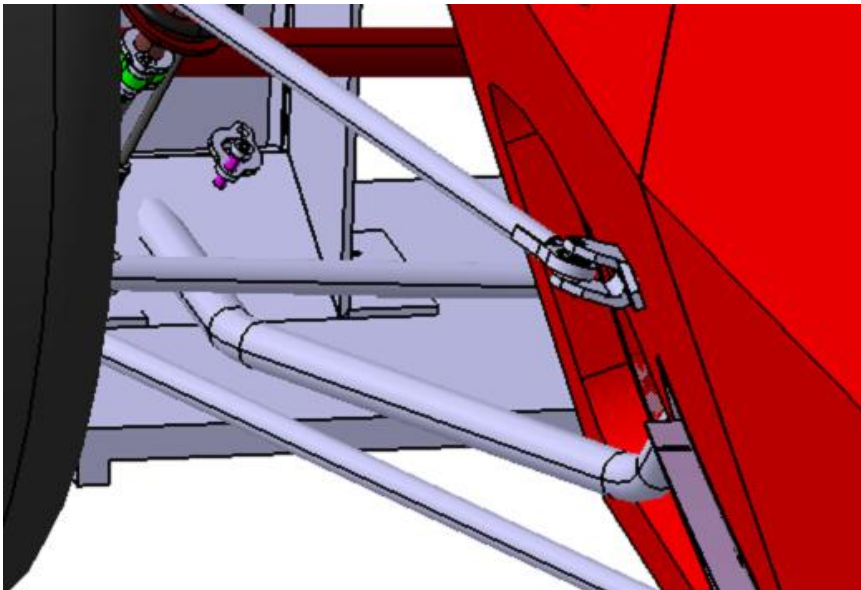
Aluminum water line, second radiator to engine inlet, view of radiator.
